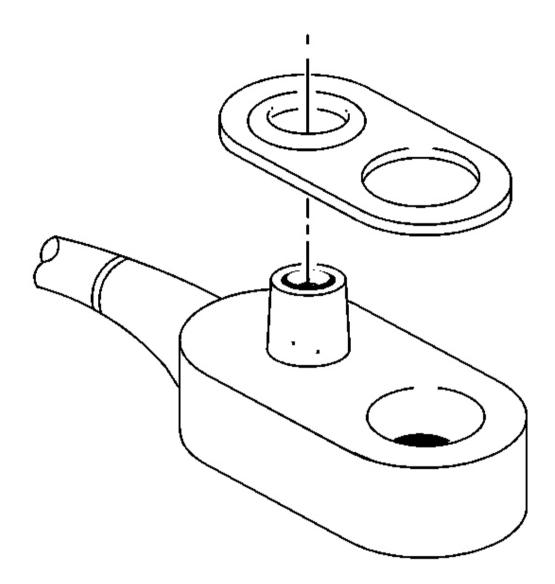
Pipe & Cover Gasket Courtesy of GENERAL MOTORS CORP.
